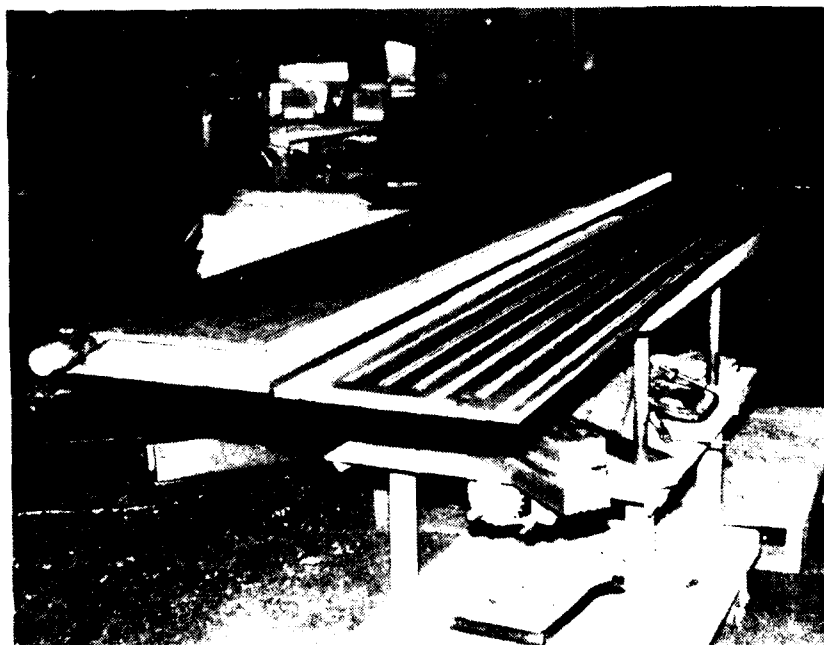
Panel Coil with Aluminum Face Plate Milled to Accept Weld Beads.
